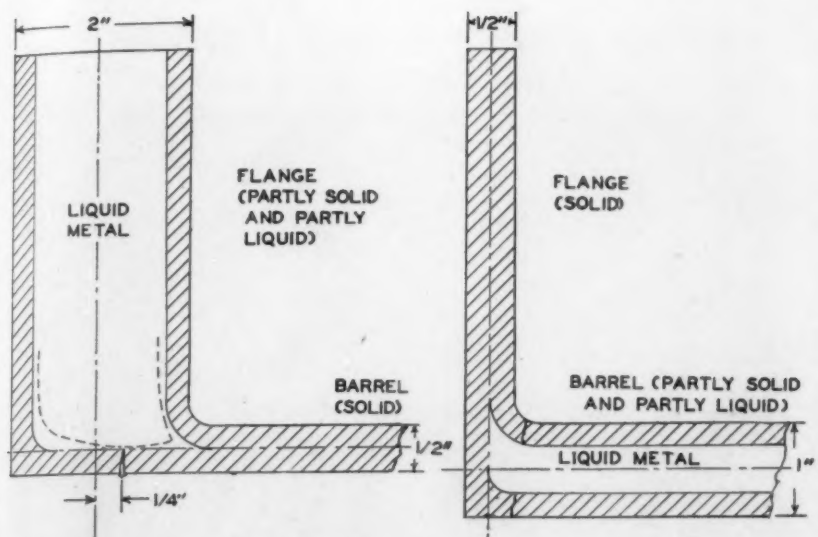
SKETCH SHOWING PROBABLE CONDITION OF METAL IN THE FLANGED END OF TWO DIFFERENT CASTINGS, APPROX. 1 TO  $1\frac{1}{2}$  MIN. AFTER POURING. CROSS-HATCHED AREAS REPRESENT SOLIDIFIED METAL; BLANK WHITE AREAS REPRESENT LIQUID METAL.
